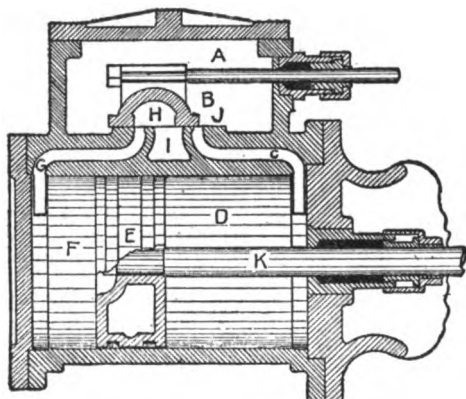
Section through a steam engine cylinder and valve. Steam from the chest passes through the port (C) into the rear end of cylinder (D) and against piston (E) which it forces toward the front end (F). At the same time the steam previously used is forced out through port (G) into the exhaust chamber (H) and through port (I) into the air. By this time the valve (B) has shifted and begins to admit steam through (G) and let it out through (C), thus driving the piston back again. The piston rod (K) acts on the fly- or driving-wheel.
